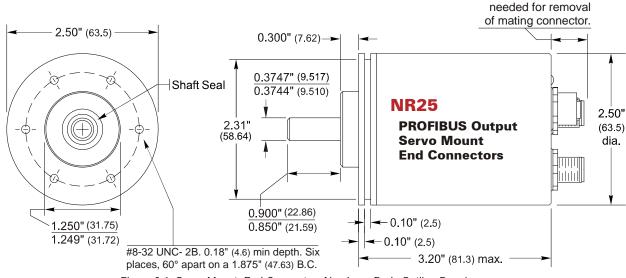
Servo Mount, End Connector, Aluminum Body Outline Drawing
